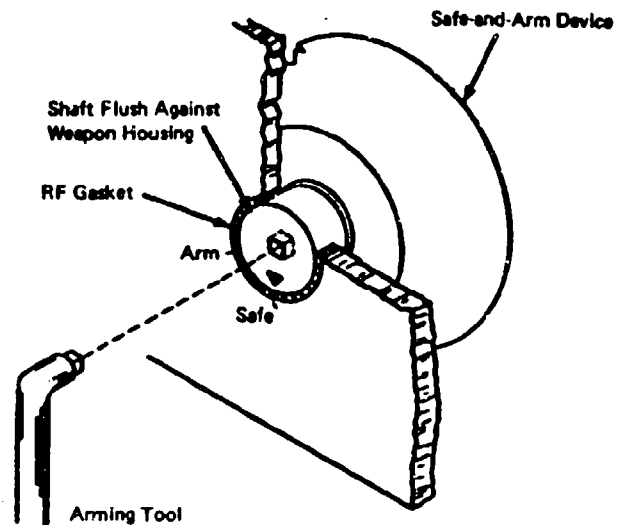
Acceptable Method of Shielding Safe and Arm Devices
